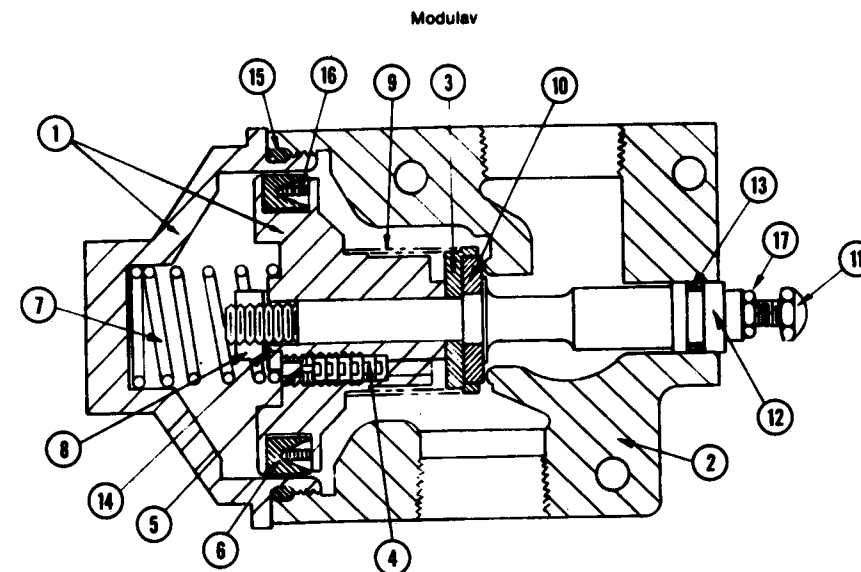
FLUSH VALVE ASSEMBLY WITH WHITE CAP (466172-001).
